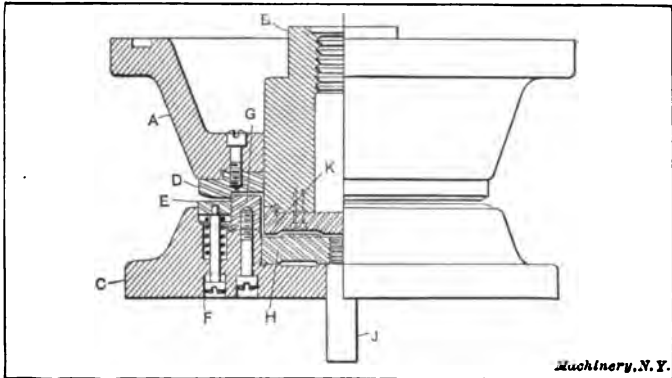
Combination Blanking, Drawing and Embossing Die for the Shell
